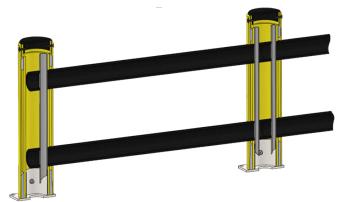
Sectional view of the properly assembled BVC140 barrier section.
